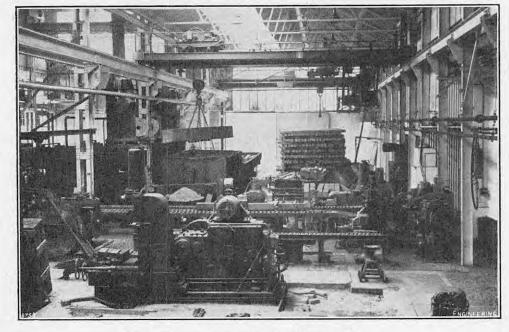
Steel Stock, and Cold-Sawing Machine.
